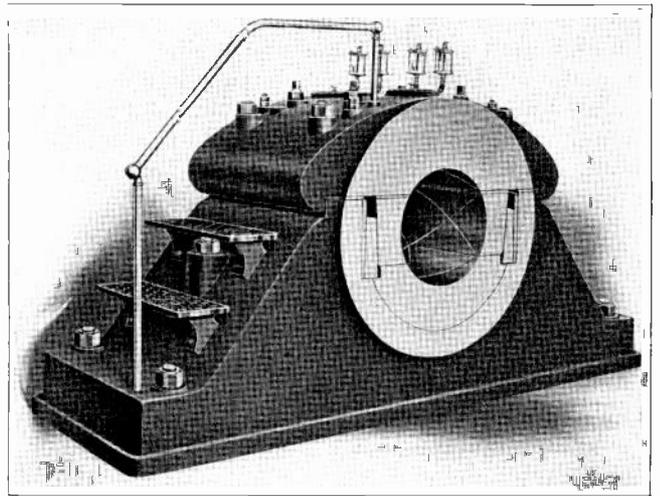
A. Very large special sleeve bearing for use with steam engines. Note the adjustable sections in the sides of the bearing to prevent pounding due to bearing slack and engine thrust.
